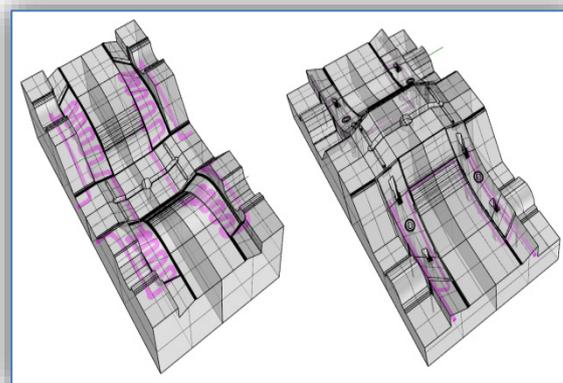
Final design of the injection mould with conformal cooling (A and B blocks)
